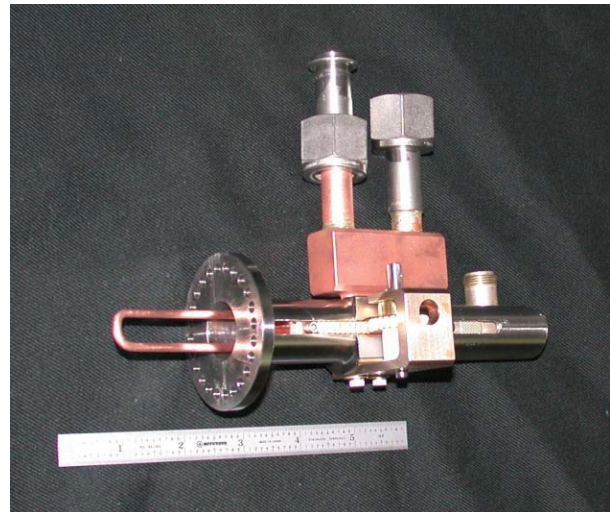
Mark IV Coupling Loop Assembly ready for installation into the cavity.
